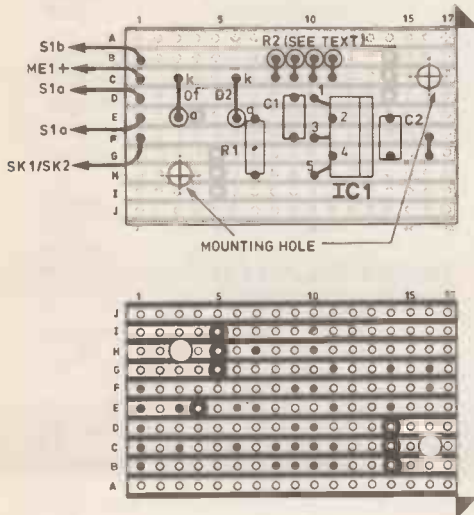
Stripboard component layout and details of breaks required in the underside copper tracks.
